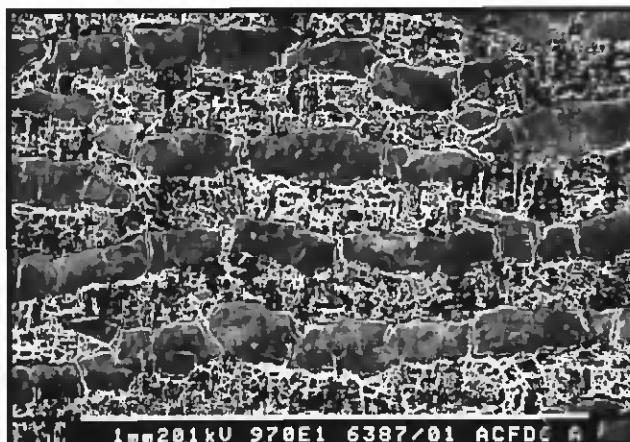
Weld interface surface after fracture, cold roll welding Al-steel with one-sided electroless Ni plating on Al surface (ACFD),  $Y = 0.598$ .
